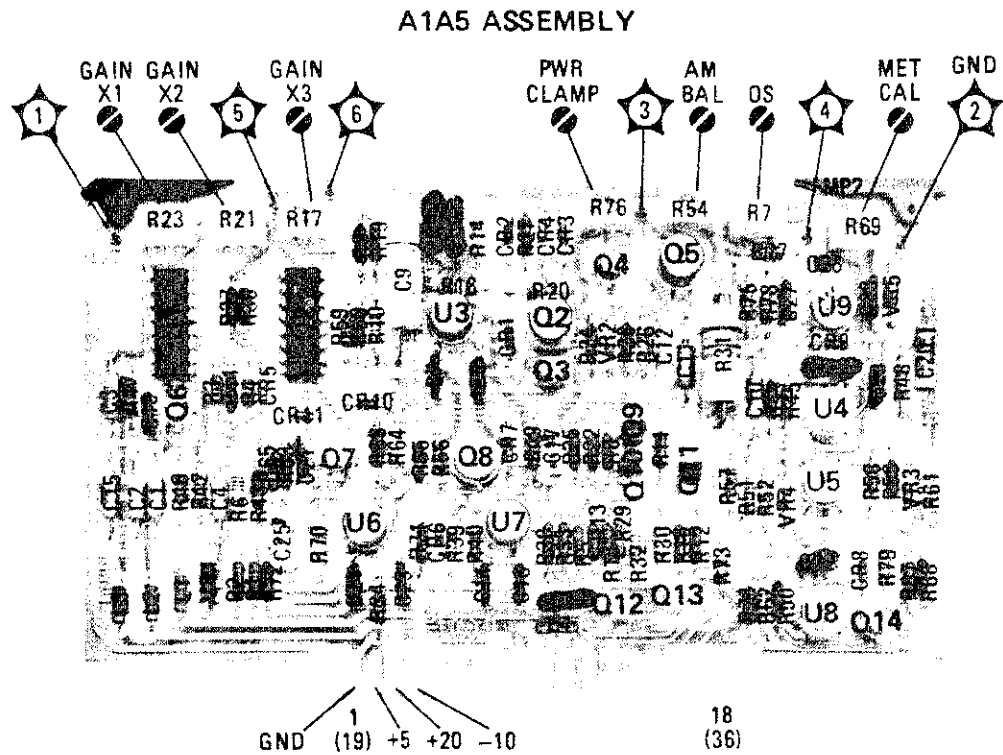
A. A1A5 ALC Assembly Component, Adjustment, and Test Point Locations (Option 008)
